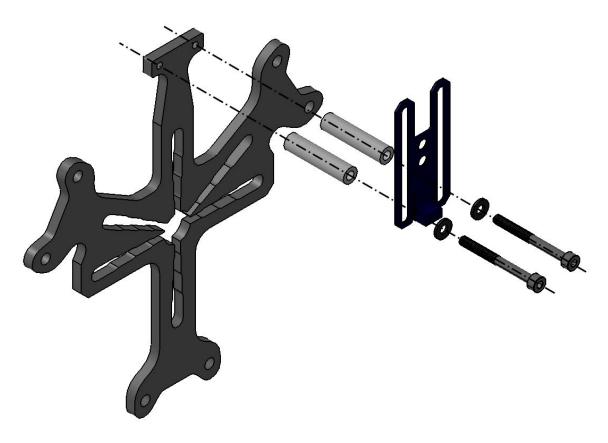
Connection of the screw, washer, spacers and the optical probe to the motor mount
